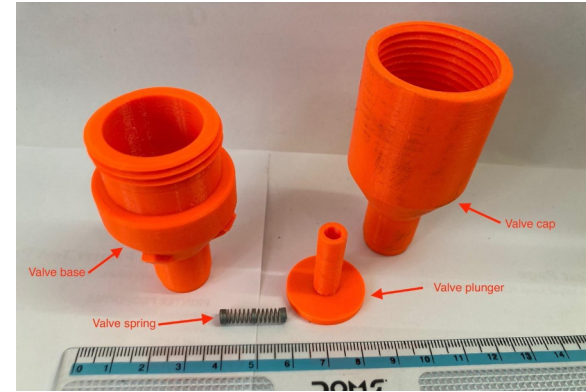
Labeled parts of the printed RMT device, showing the valve base, valve spring, valve plunger, and valve cap.
